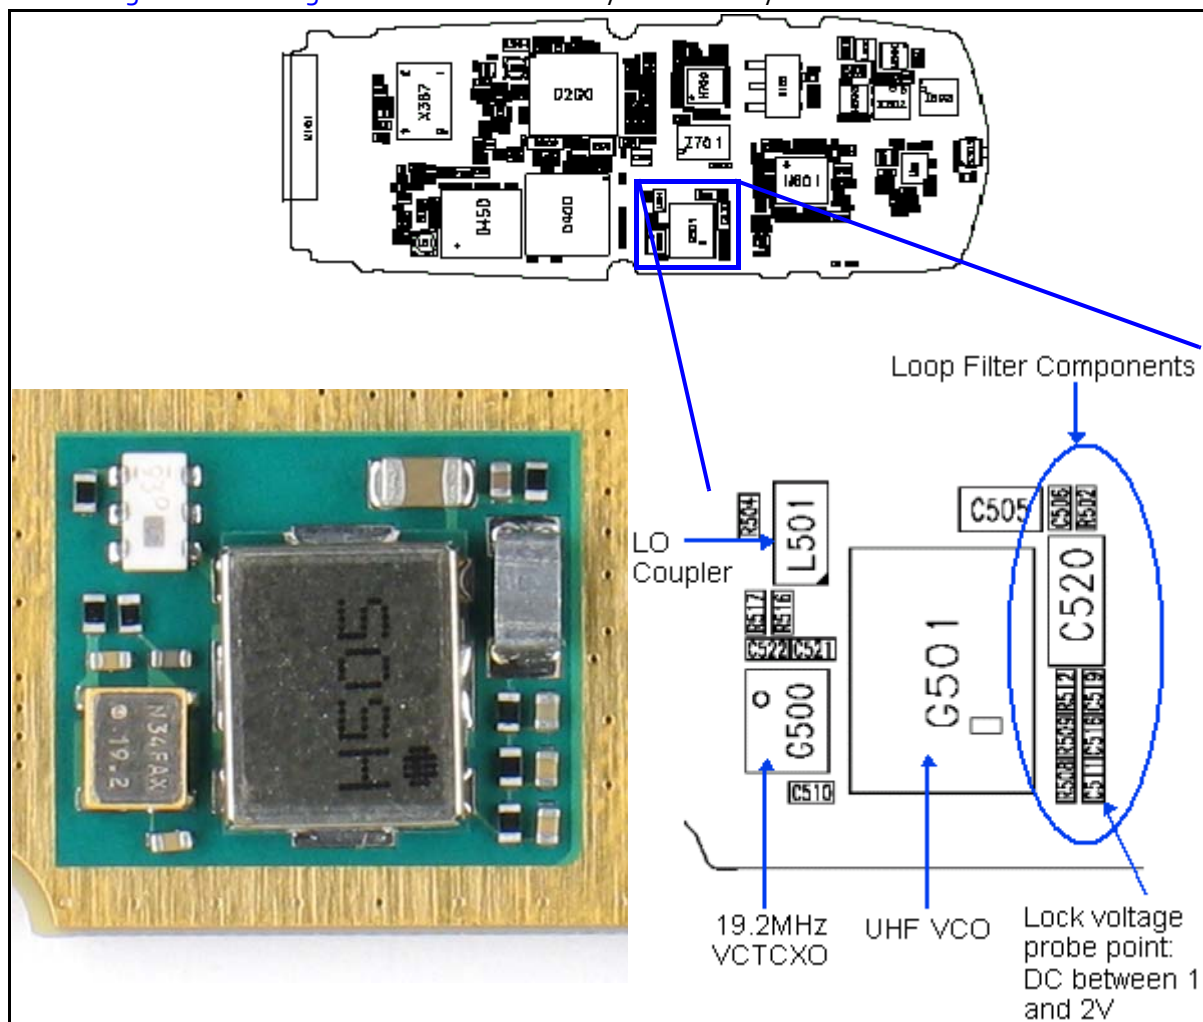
(Top) PWB. (Bottom left) A zoomed view of the testing points on the UHF synthesizer layout. (Bottom right) A zoomed view of the UHF synthesizer layout with part numbers.
